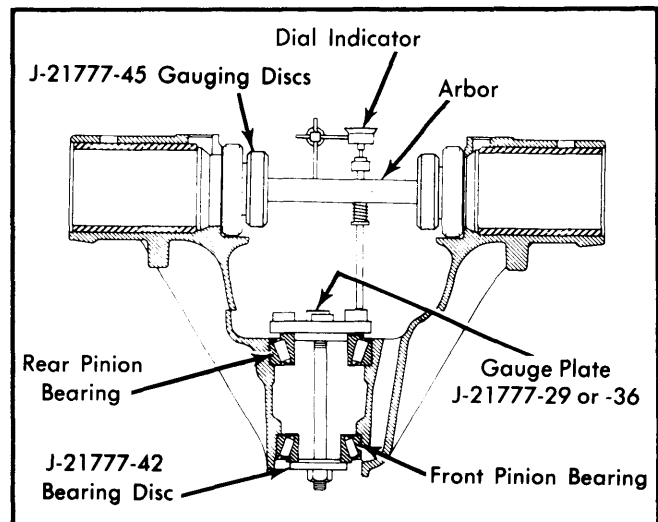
Sectional View Showing Use of Pinion Depth Tool Set J-21777)
